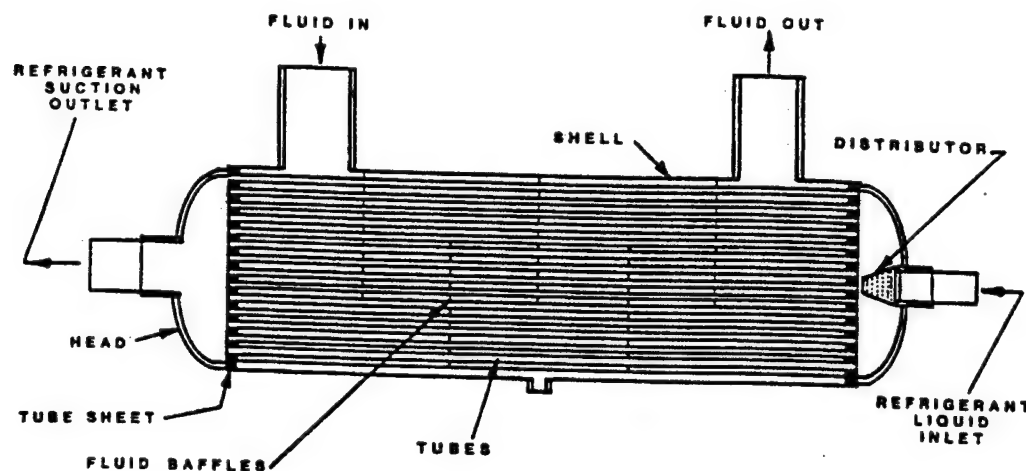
Direct-Expansion Shell-and-Tube Cooler.
